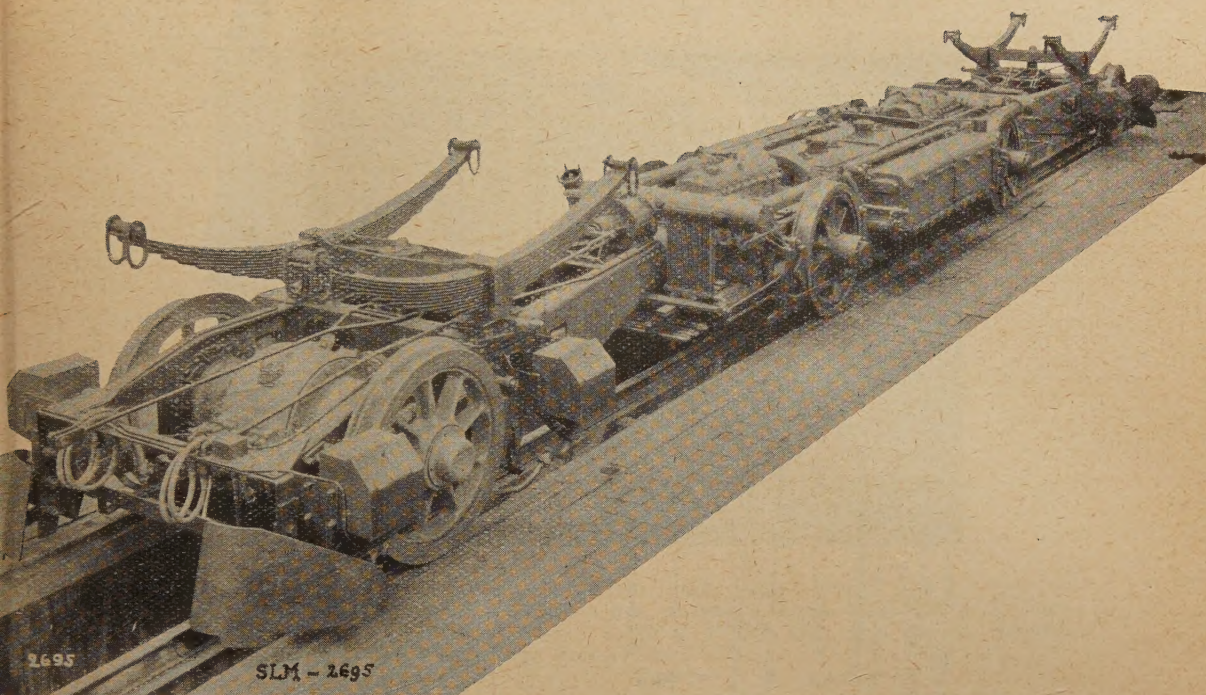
View of the wheels with the driving mechanism and spring gear of the rail motor coach shown in figures 1 and 2.
